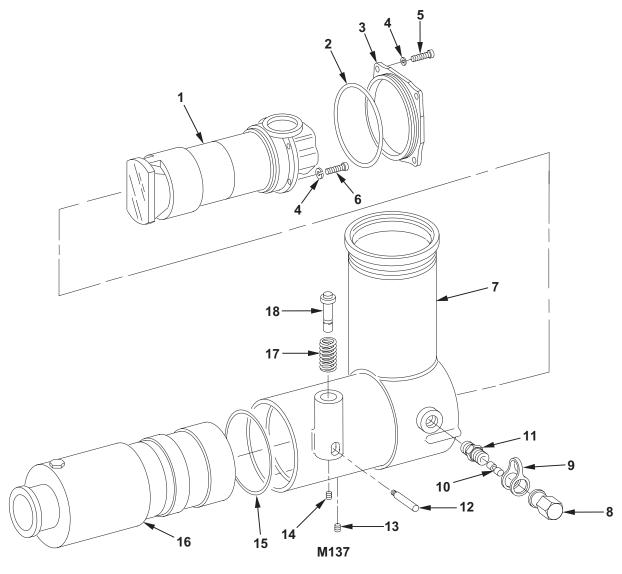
Elbow Assembly, M137, 11741201, and Elbow Assembly, M137A2/M137A3, 12984733 (Sheet 1 of 2).
